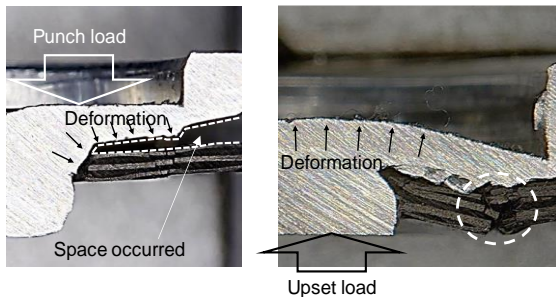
Mechanism of fracture of joint by plastic deformation and cross section of fracture of joint
